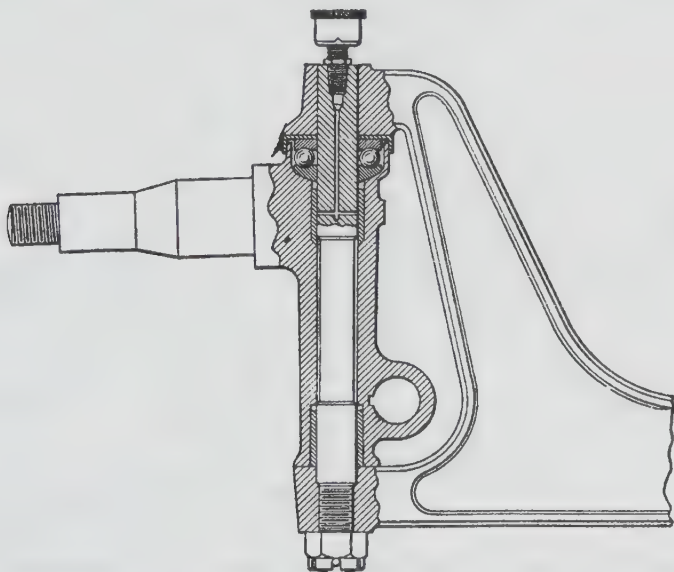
ELLIOTT TYPE STEERING HEAD WITH PIVOT PIN BEARINGS IN KNUCKLE.
